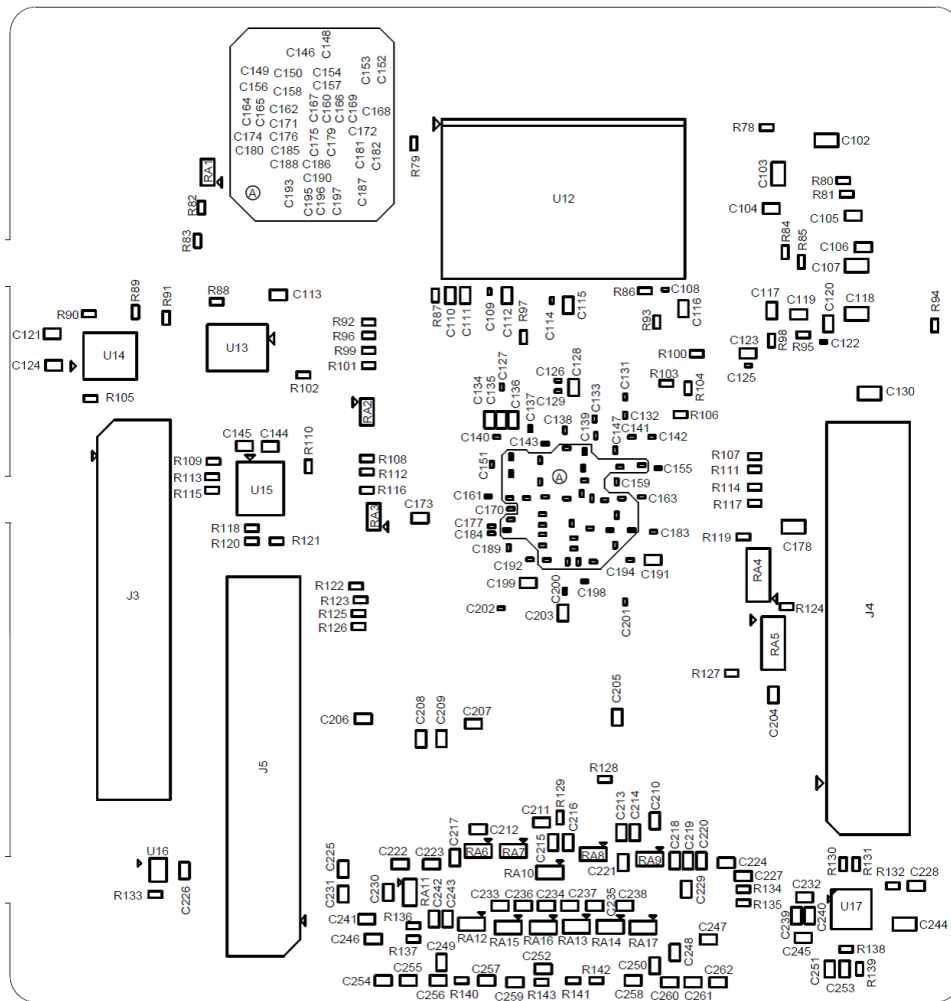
TMDSCSK8127 Assembly Layout (Bottom View)
